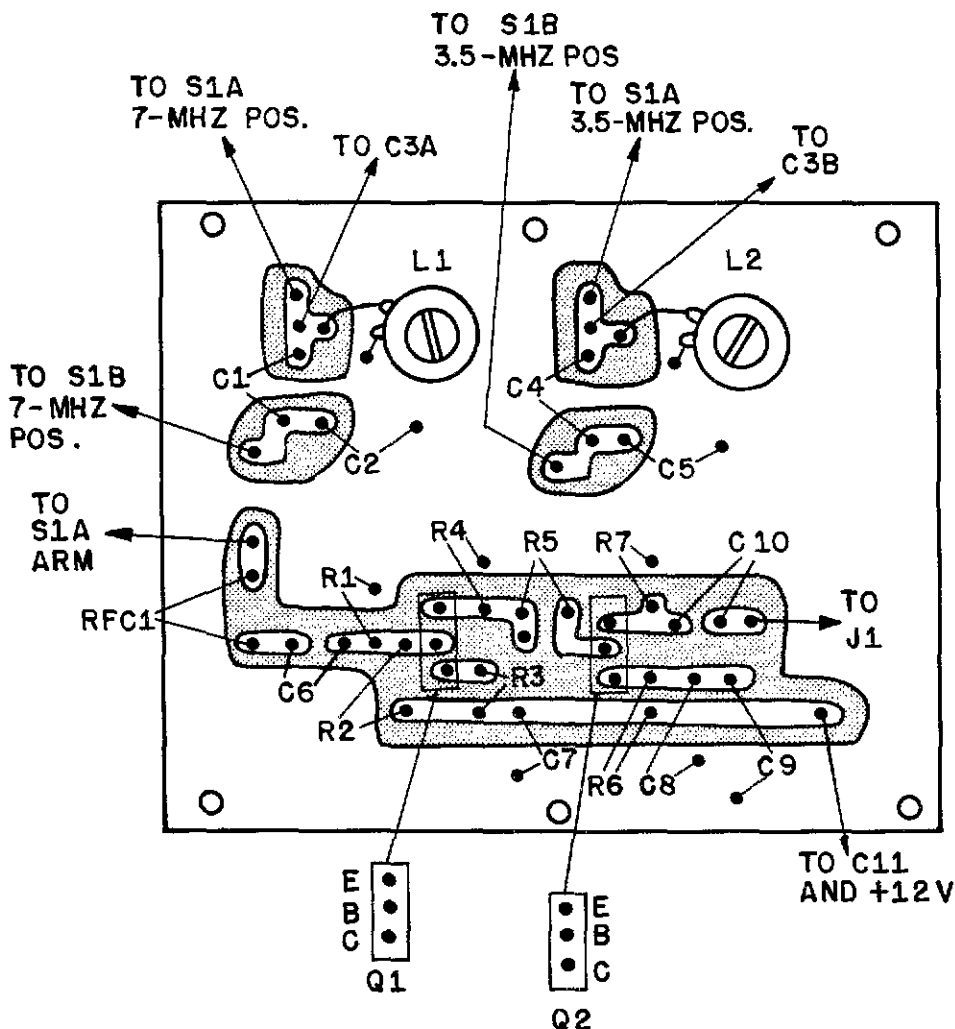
Scale template for the VFO circuit board. A foil-side view is given here.
